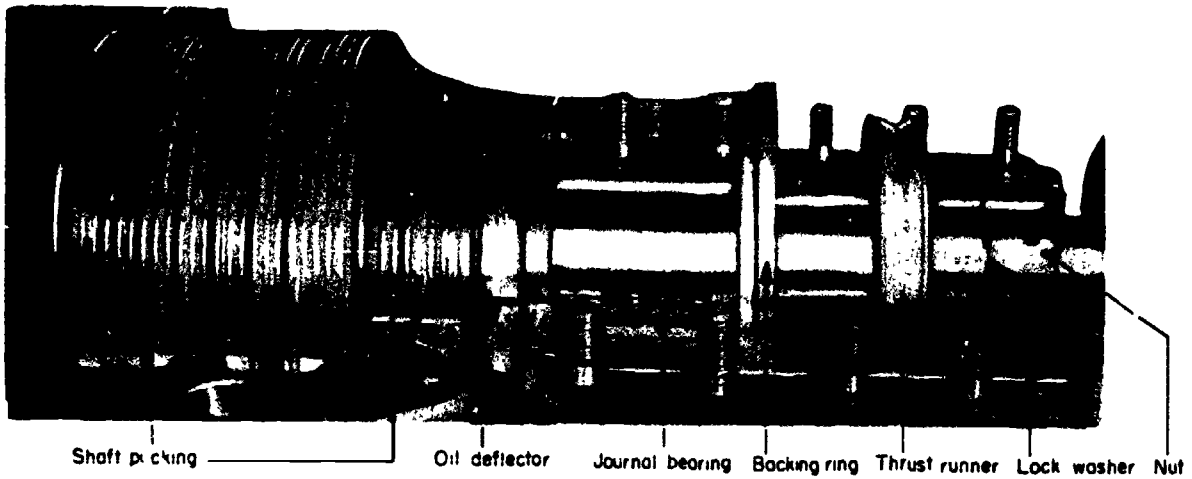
Forward end of a high pressure turbine (base rings, leveling plates, and thrust shoes removed).
